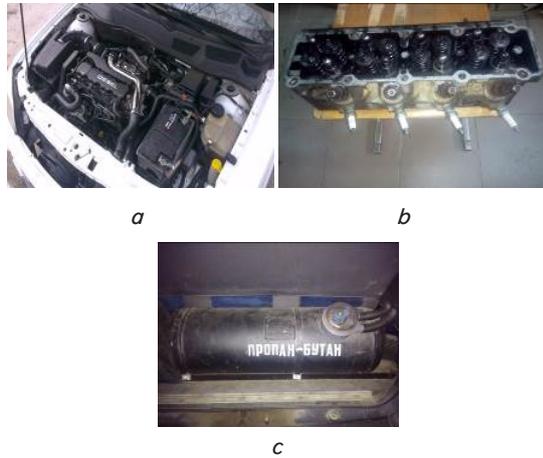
Diesel engine of Opel Astra make re-equipped for a propane-butane mixture: *a* – diesel engine of model X17DTL; *b* – converted engine cylinder head; *c* – gas cylinder equipment
